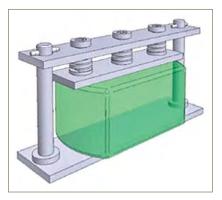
Careful design of the fixturing is required so that very even force will be applied to the heat exchanger. As the temperature rises, the metal heat exchanger expands and the C/C springs compress
